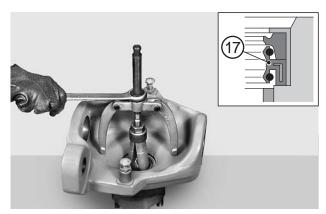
Using a puller, remove seal ring (17) from steering case (3).
